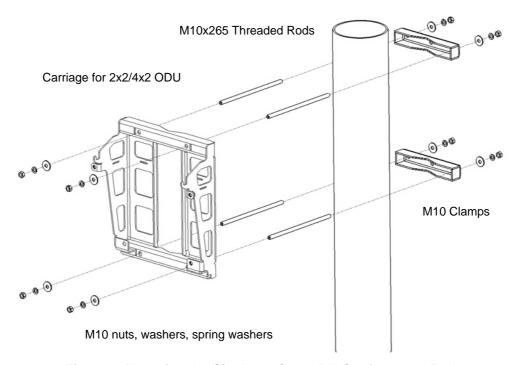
Mounting the Single 2x2/4x2 ODU Carriage on a Pole
